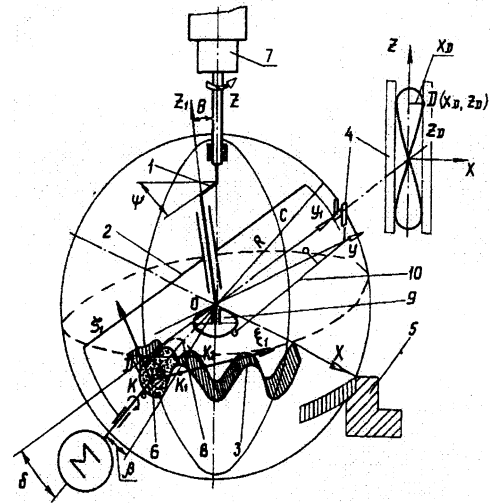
Spatial scheme of the realizing for the Teeth processing method by rolling using precessional tool.
